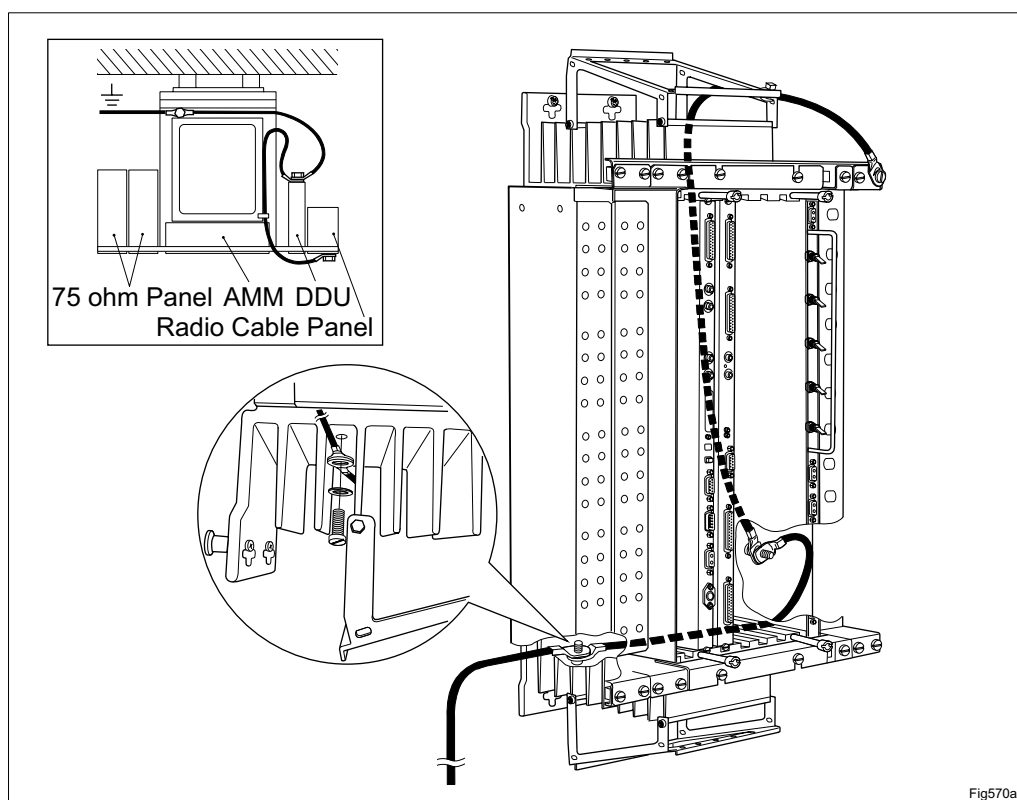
Earthing cabling for wall installation of 2U-1, 2U-2 and 4U Magazines.
